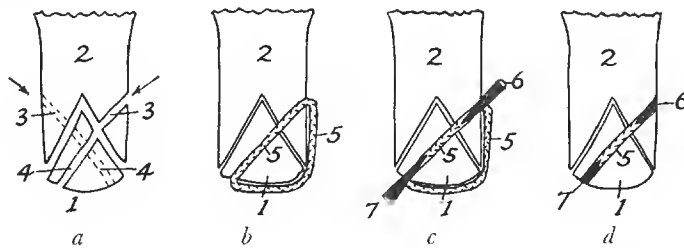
Lashing solid parts of stern piece to keel: *a*, section of triangular keel (1) and solid stern piece (2). A hole (3) is bored through the stern piece from the outer side about 0.75 inches above the lower edge in the direction shown. Six such holes about 2 inches apart are bored through the solid 12-inch length of the stern piece. A similar set of holes are bored through on the other side, arranged to be in the intervals facing the first set. The stern piece is fitted over the keel which is marked with a blackened midrib inserted through the stern piece holes. Holes (4) are drilled in the keel from the points marked on the sides in the direction shown. The two sets of holes come out on opposite sides to the middle line of the under surface of the keel. *b*, The stern piece is again fitted and a piece of braid run through the continuous hole between stern piece and keel with a midrib needle. The continuous loop method is used and the lashing turns (5) firmly made to draw the two pieces together. *c*, A pointed stick (6) of hard wood is driven into the stern piece hole to jam the lashing turns against the side of the hole and act as a wedge. A similar wedge (7) is driven into the hole in the keel. *d*, The lashing being secured by the wedges, their ends are cut off and the external parts of the braid, being unnecessary, are cut off also. All the holes in the stern piece are so treated. The bow piece solid part is lashed in a similar way.
